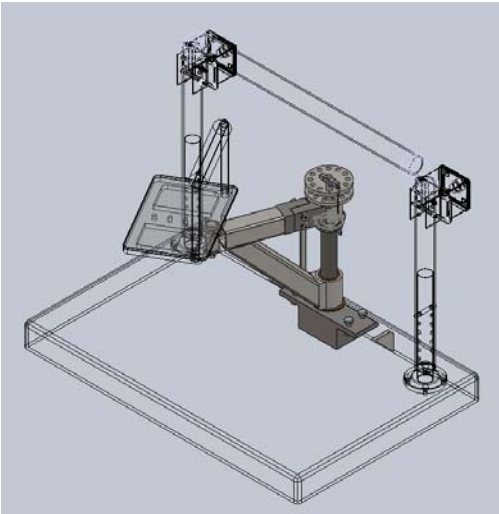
Truss Structure welded to Hub Assembly which rotates around the Main Shaft
